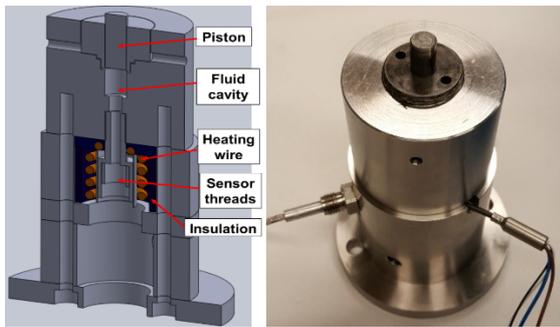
Modified measurement head with heating. The sensor is connected from below using sensor threads of the measurement head. The fluid inside the cavity is in contact with the sensor membrane, thus transferring pressure generated by piston compression to the sensor.
